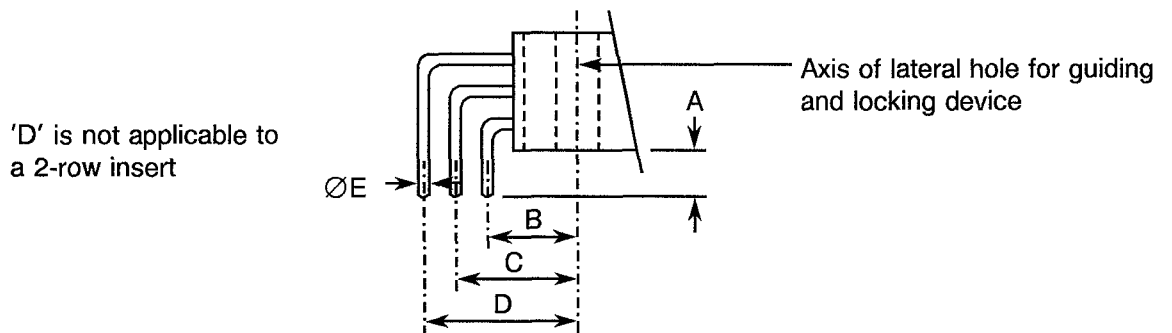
PHYSICAL DIMENSIONS(CONTINUED)
